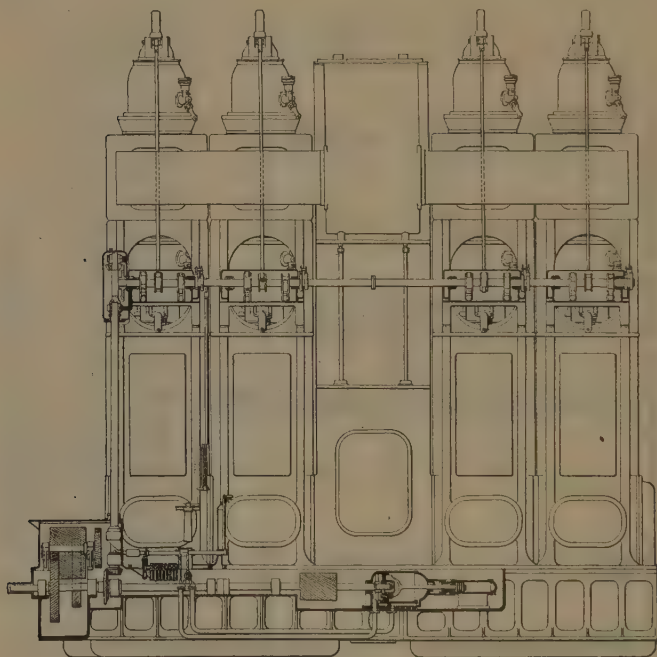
WORTHINGTON ENGINE, SIDE VIEW SHOWING VALVE GEAR
